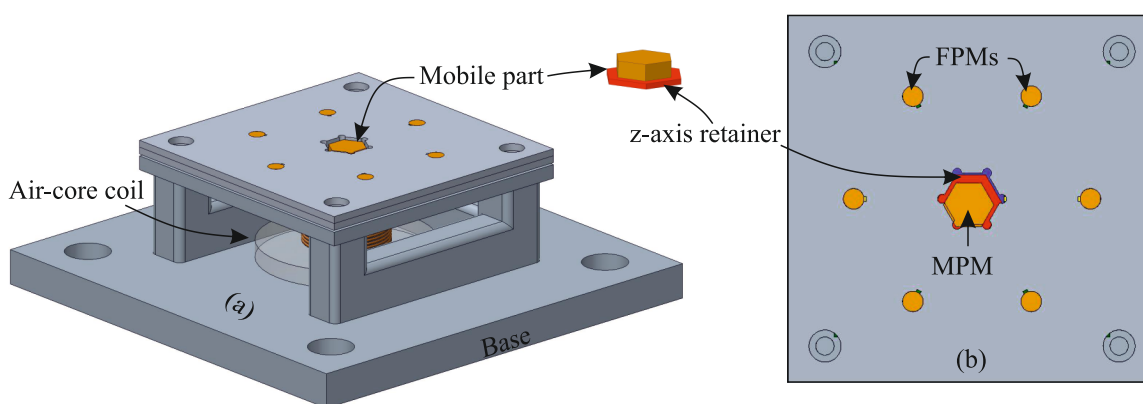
CAD model of a 3D digital actuator with hexagonal mobile magnet. (a) An isometric view of the actuator with the assembly of mobile part.(b) Top view of the actuator.
